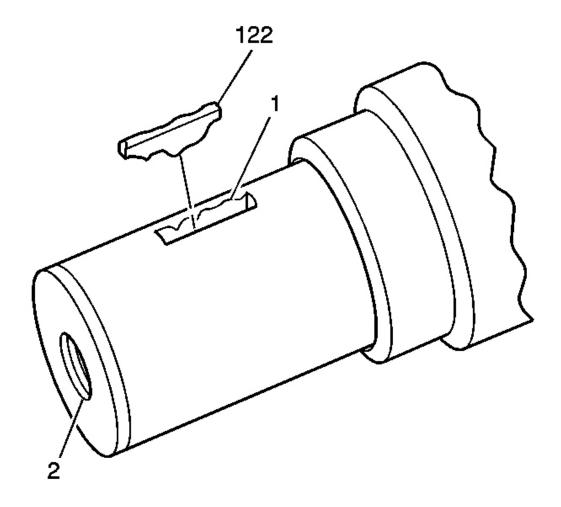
View Of Crankshaft Key, Keyway & Threaded Hole Courtesy of GENERAL MOTORS CORP.
